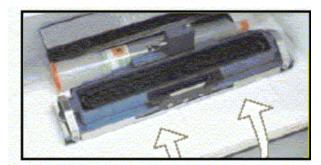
Transfer Head Stored with Paste Enclosed when not in Use
